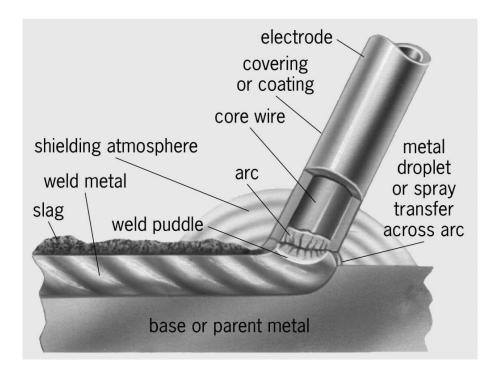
Arc welding setup (www.hotrodders.com)
